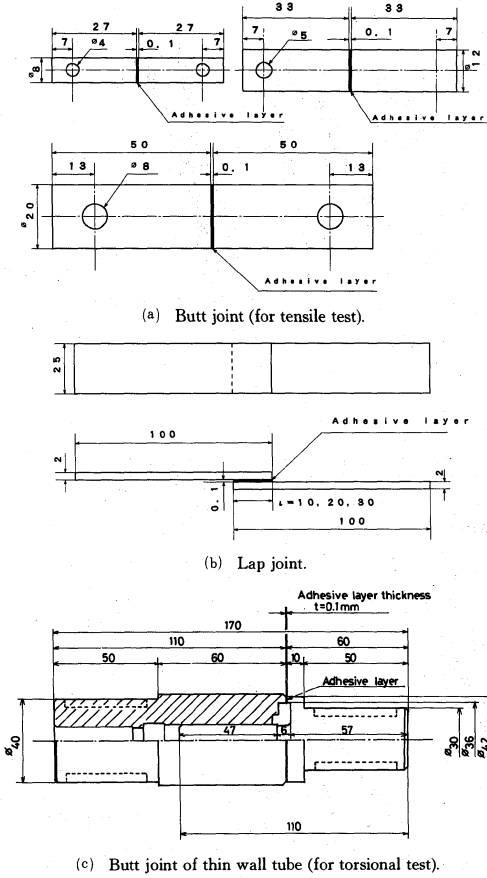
Shape and sizes of the adhesive bonded lap and butt joints.
